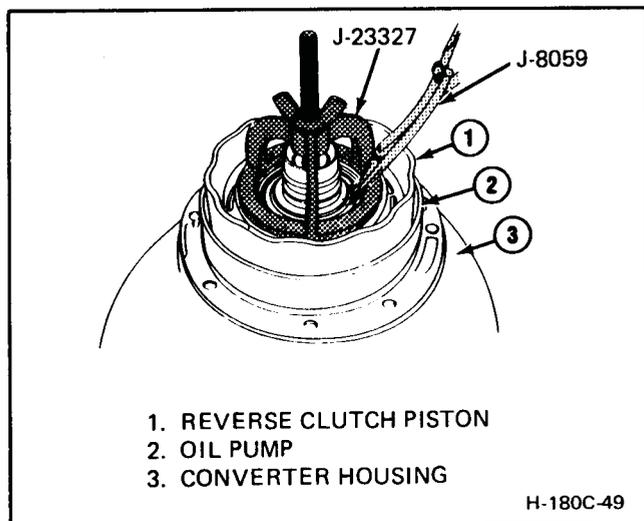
C-63 Installing Reverse Clutch Piston Into Oil Pump
